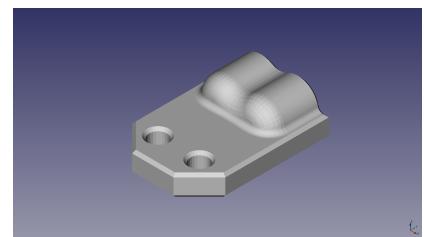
Begonia 3D Printed Cable Carrier Mount Render
